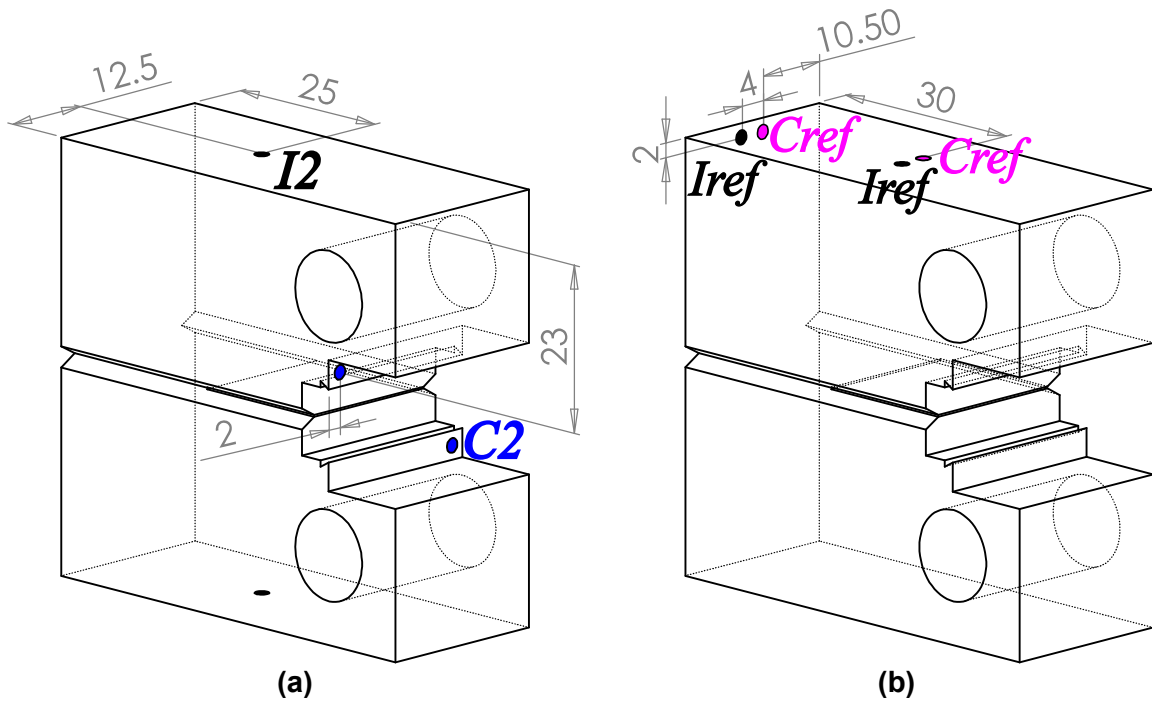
PD configuration use to measure (a) crack extension measurement, and (b) reference measurement (dimensions in mm)
